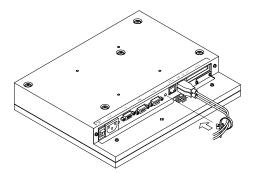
Attaching the USB cable removal prevention clamps < 2/3 >
